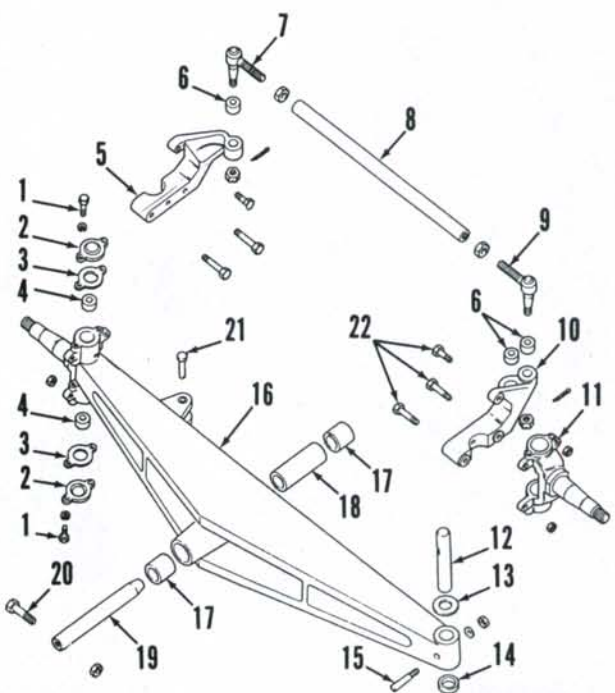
Exploded view of heavy duty (cast) nonadjustable front axle used on some tractors.
